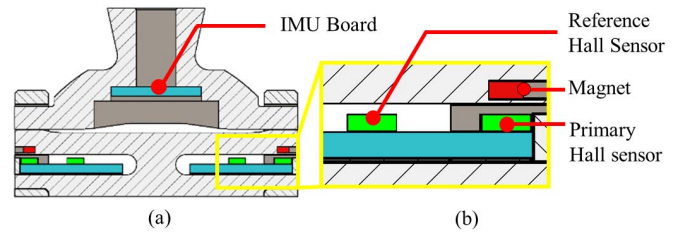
(a) Section view of the device showing electrical component placement. (b) Close-up view of the Hall sensor and magnet placement.
